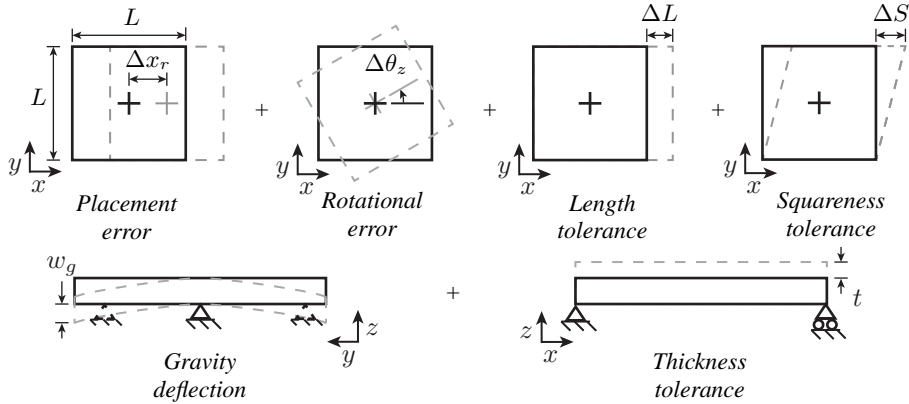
The position and dimensional tolerances of the reticle in the stage. The top drawings shows its in-plane tolerances whilst the bottom figures represent its out-of-plane tolerances.
